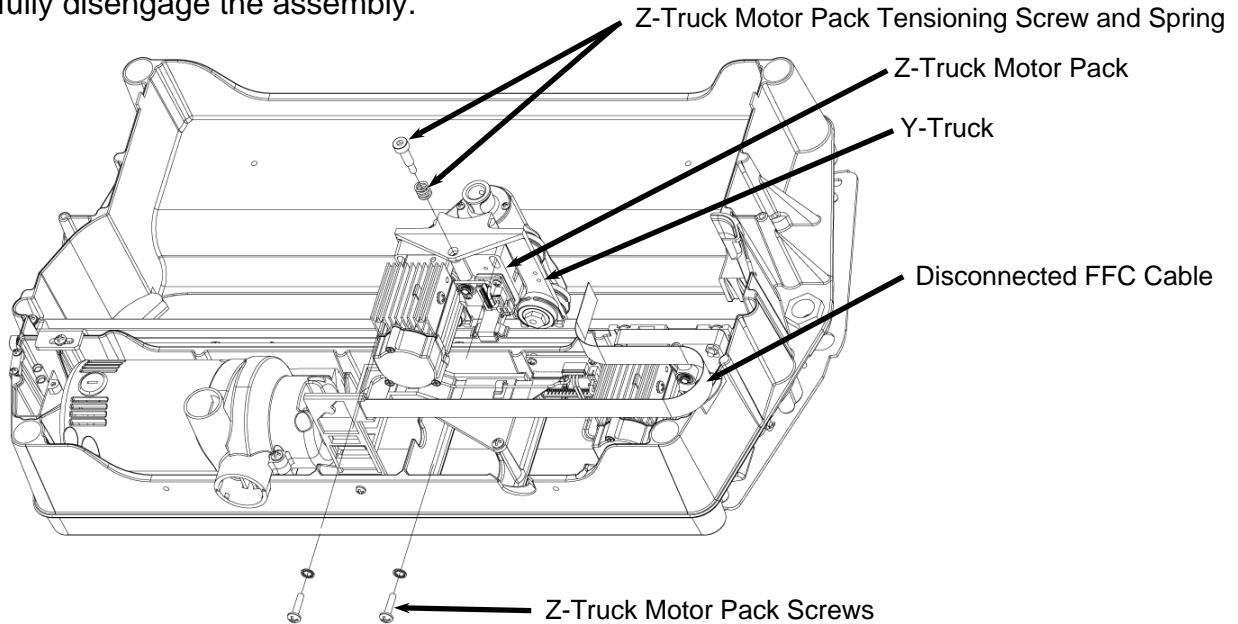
VIEW OF THE BACK OF THE Z-MOTOR PACK
